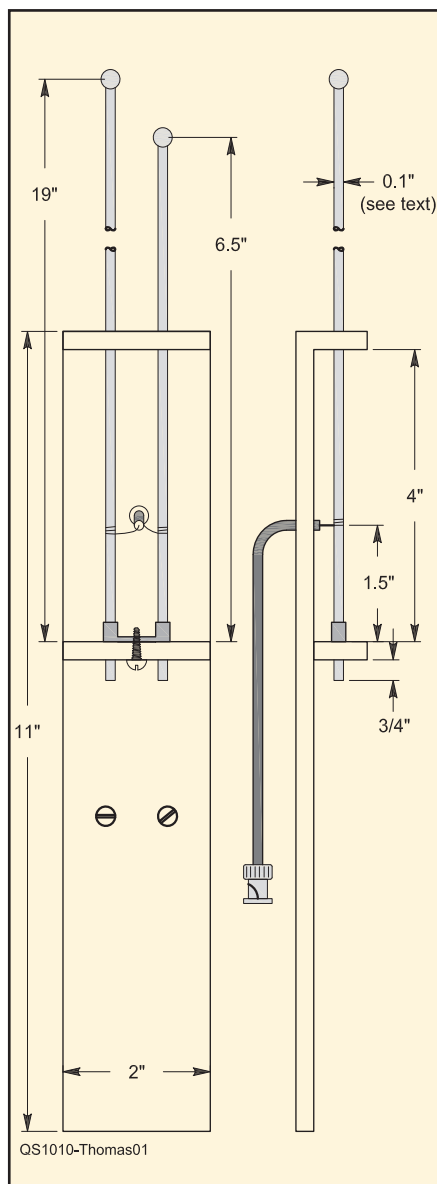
Dimensions of 70 cm portable J-pole antenna.
